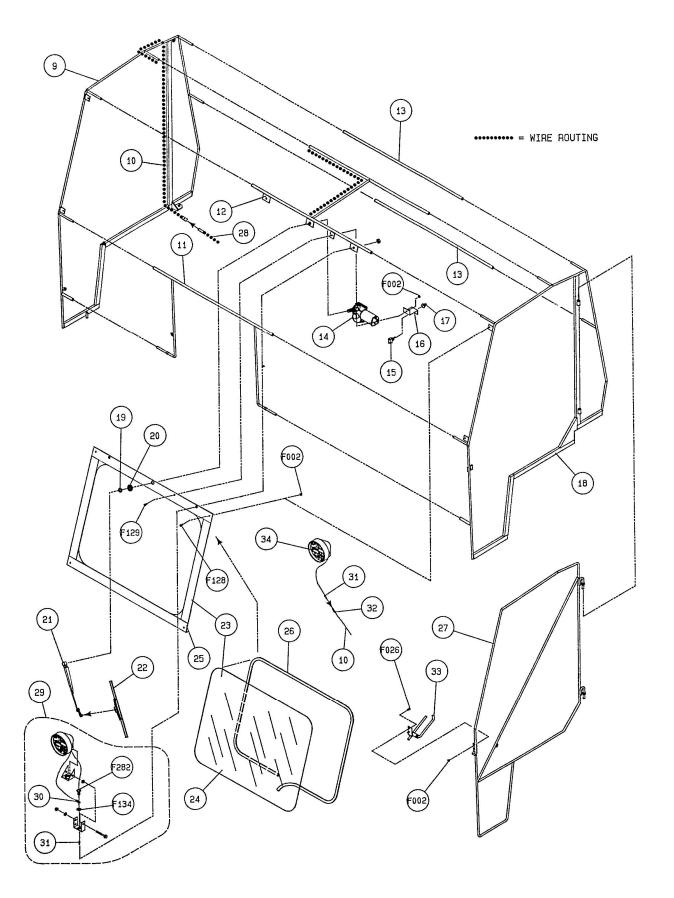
P/N SC5661 OPERATOR CAB ASSEMBLY
